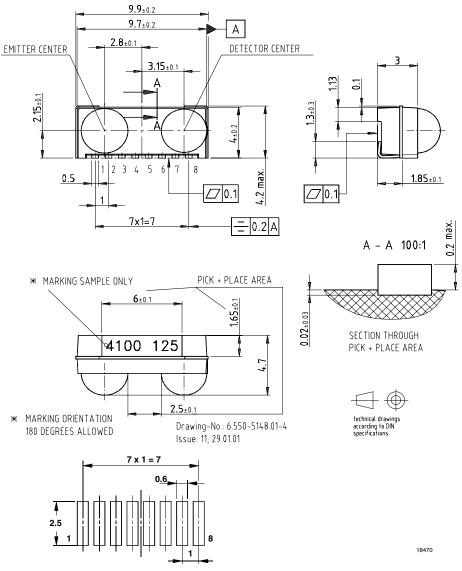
Package Drawing TFDU4101. Tolerance ± 0.2 mm if not otherwise mentioned
